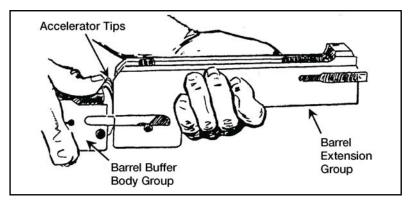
Separation of the barrel buffer and barrel extension assemblies.
